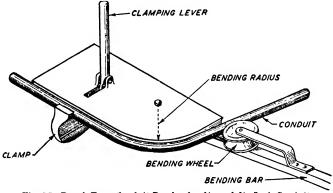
Bench Type Conduit Bender for 1/2 - and 3/4 - Inch Conduit
